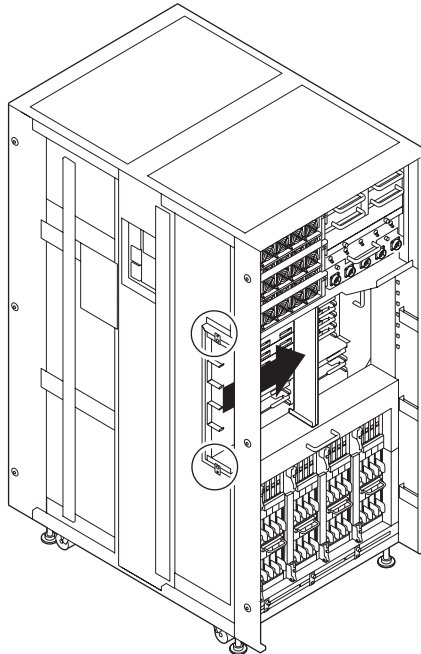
Removing the Right Side Cover of the Base Cabinet
